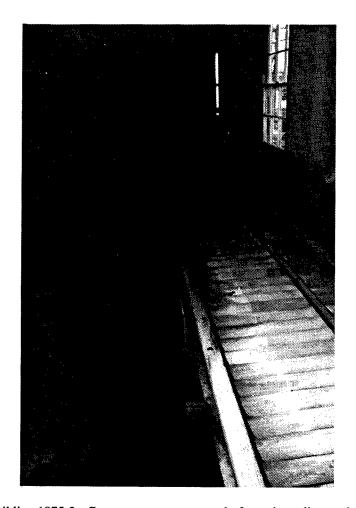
Building 1875-2: Can conveyor constructed of wooden rollers and frame located on the first floor.
